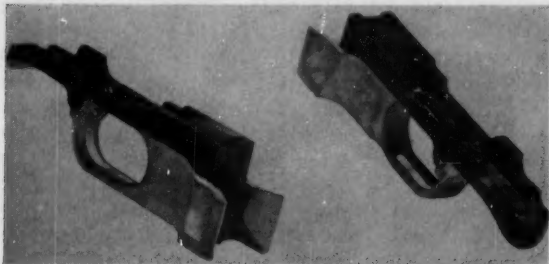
Shell-molded trigger housing of Browning automatic rifle. Machining is required only on the wear surfaces indicated by dark paint.
